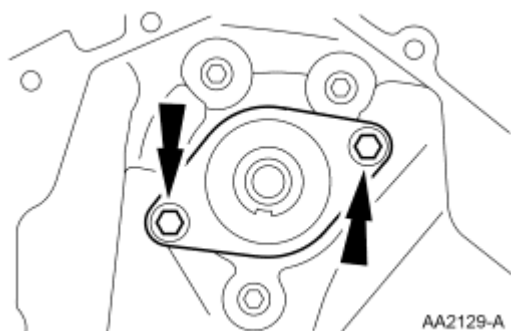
Locating Camshaft Thrust Plate & Bolts
